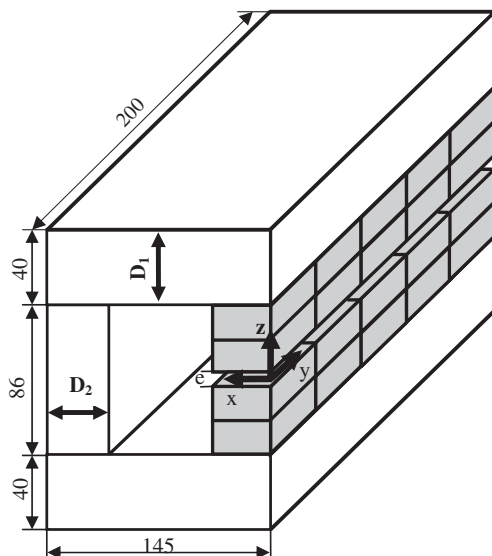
Geometry and dimensions (mm) of the magnetic structure.
